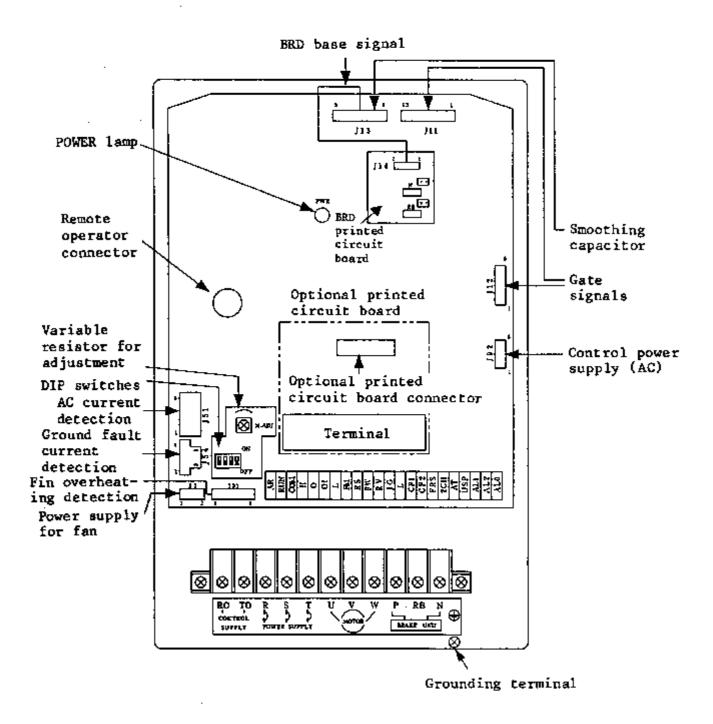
Printed Circuit Board Layout Disgram (Example: 2.5 - 5.5LB2)
